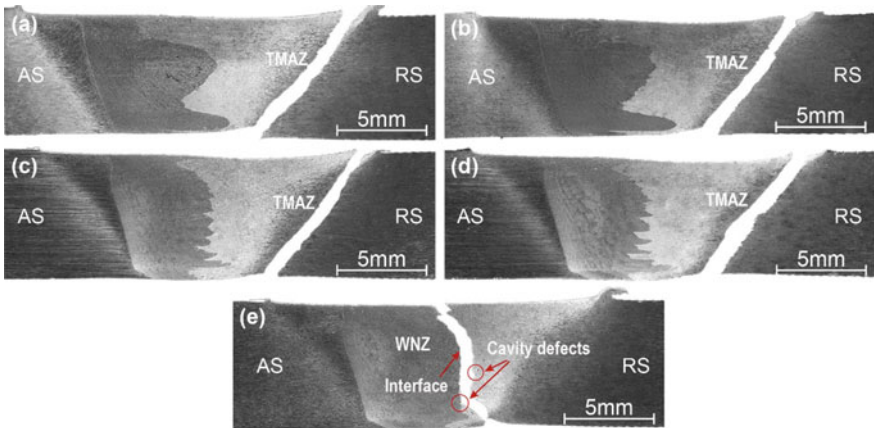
Fracture locations of joints 6 mm thick 2219-T6 Al alloys: a 66.7 mm/min, b 100 mm/min, c 200 mm/min, d 300 mm/min, and e 400 mm/min
